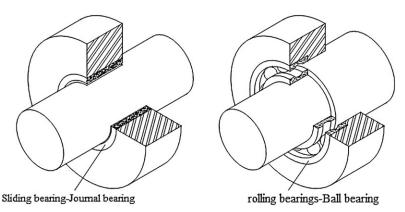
A journal bearing and a ball bearing (Childs, 2013).
